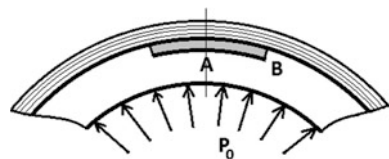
Cross-sectional area of the pipe with a machined defect
